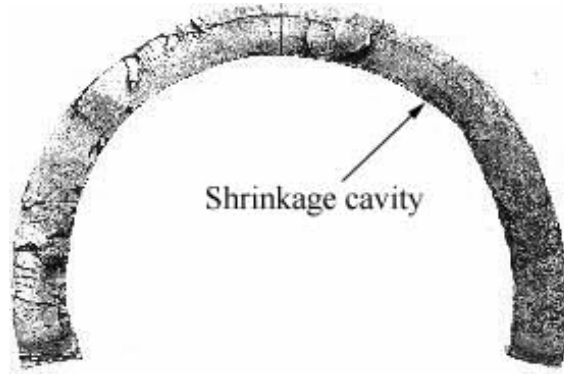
Fracture surface of the broken cast steel bridge pier
